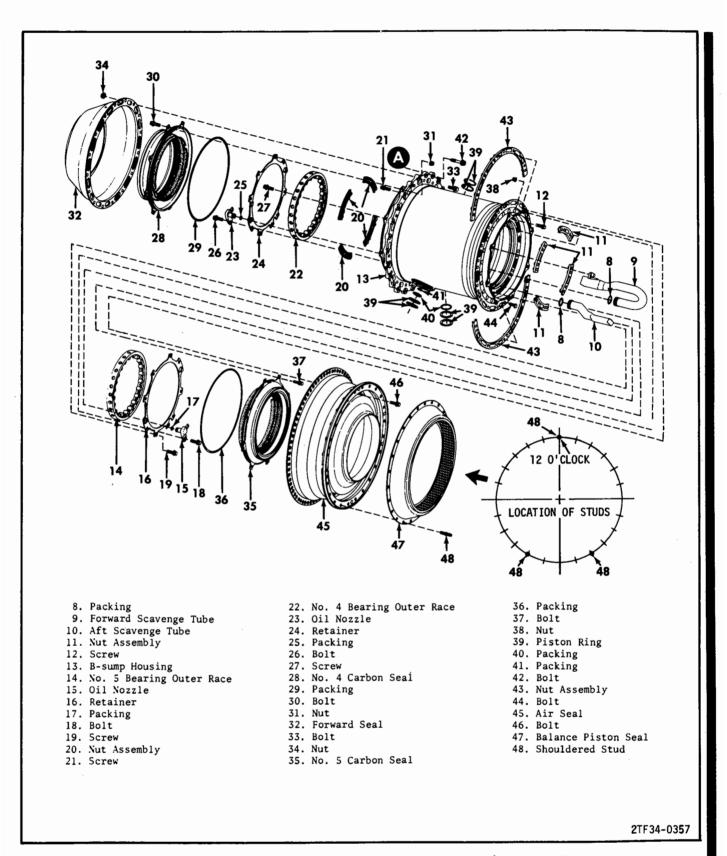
Assembly of Combustion Chamber Module (Sheet 2 of 4)
